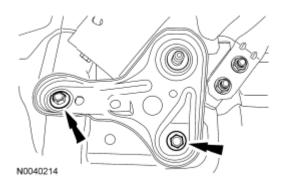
Locating Subframe Bracket And Bolt Courtesy of FORD MOTOR CO.
